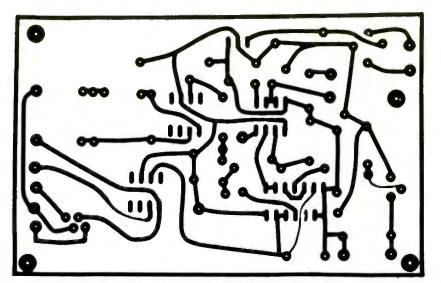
Actual-size etching-and-drilling guide for fabricating a printed-circuit board for the project.
